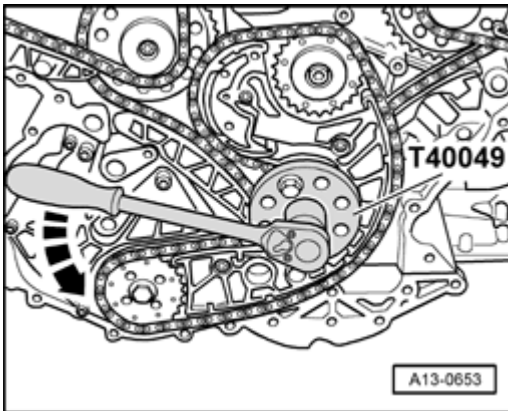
Rotating Crankshaft To TDC Ignition Timing
